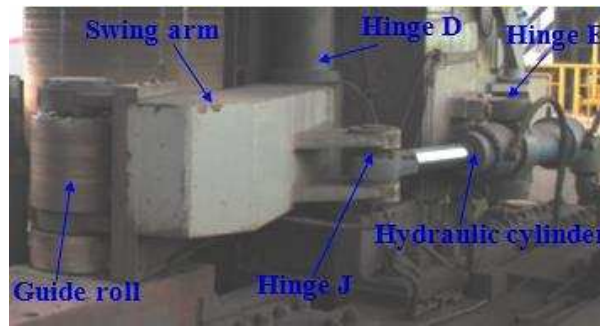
Mechanical structure of guide roll system in radial-axial ring rolling mill
